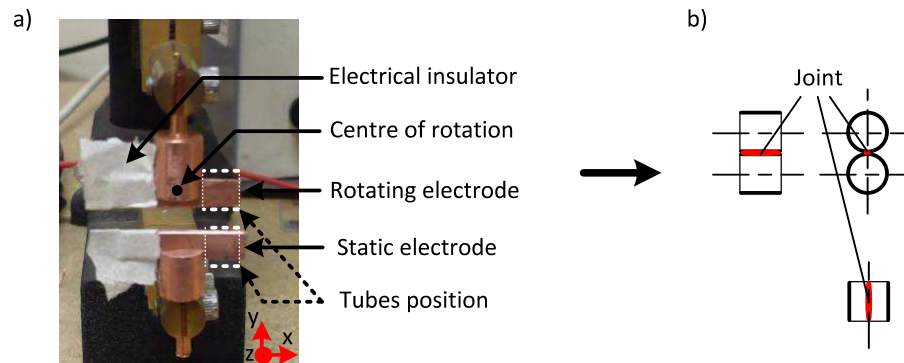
Electrical resistance welding process : (a) welder set-up and (b) schematic of the line weld between tubes.
